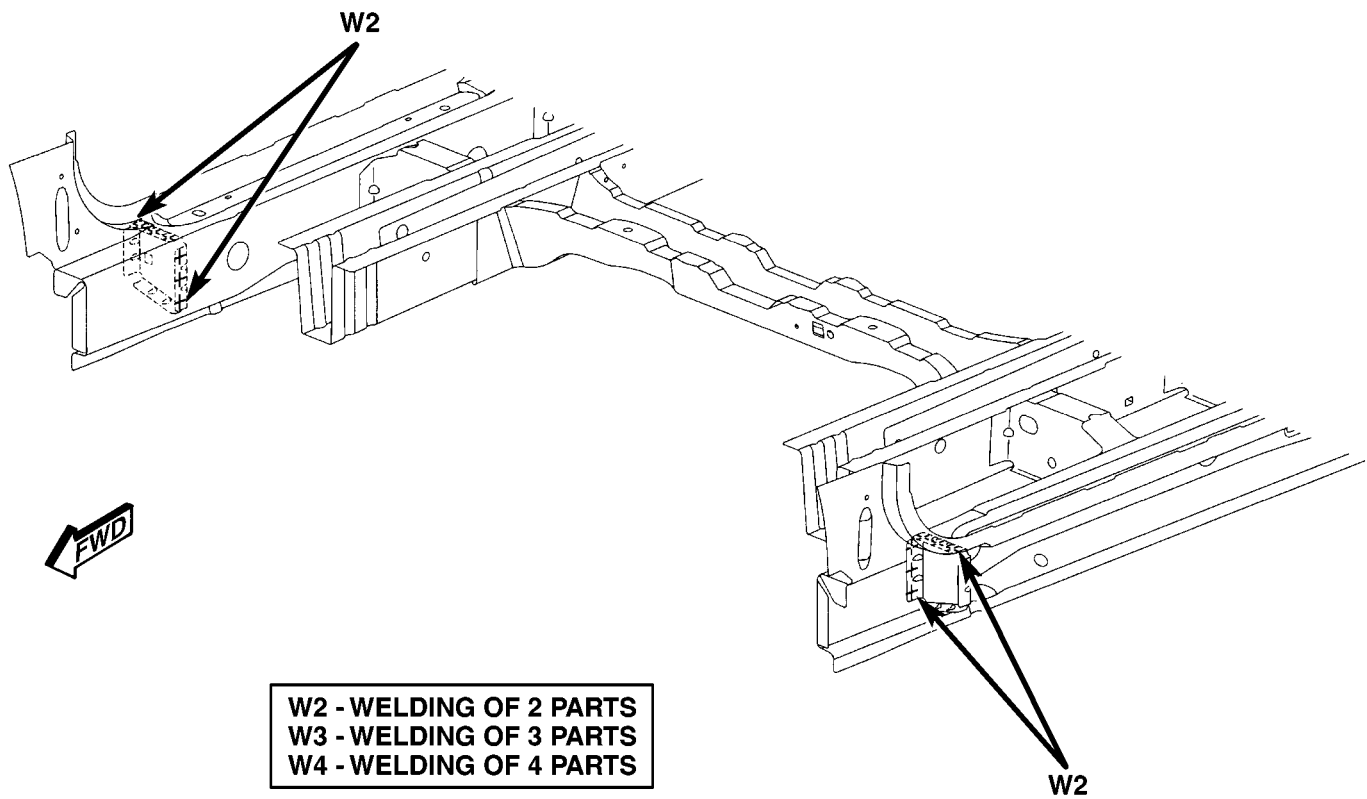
FLOOR PAN SIDE RAIL REINFORCEMENT
